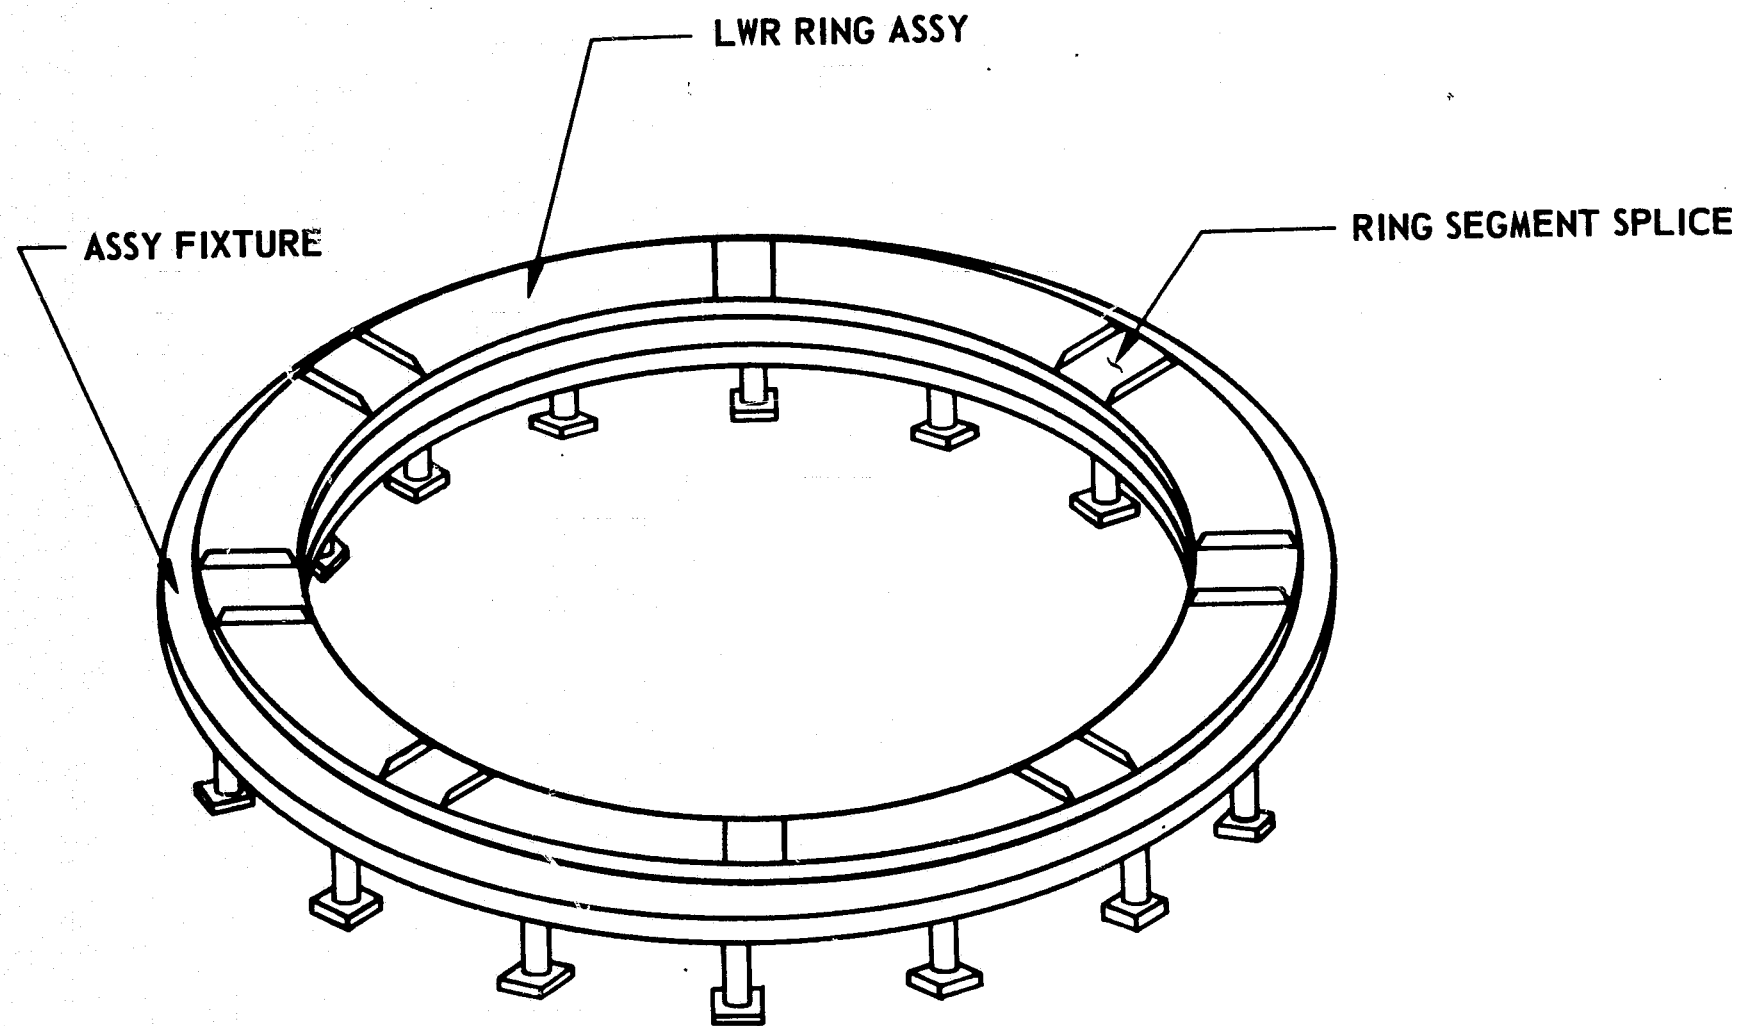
AFT SKIRT LOWER RING ASSEMBLY
